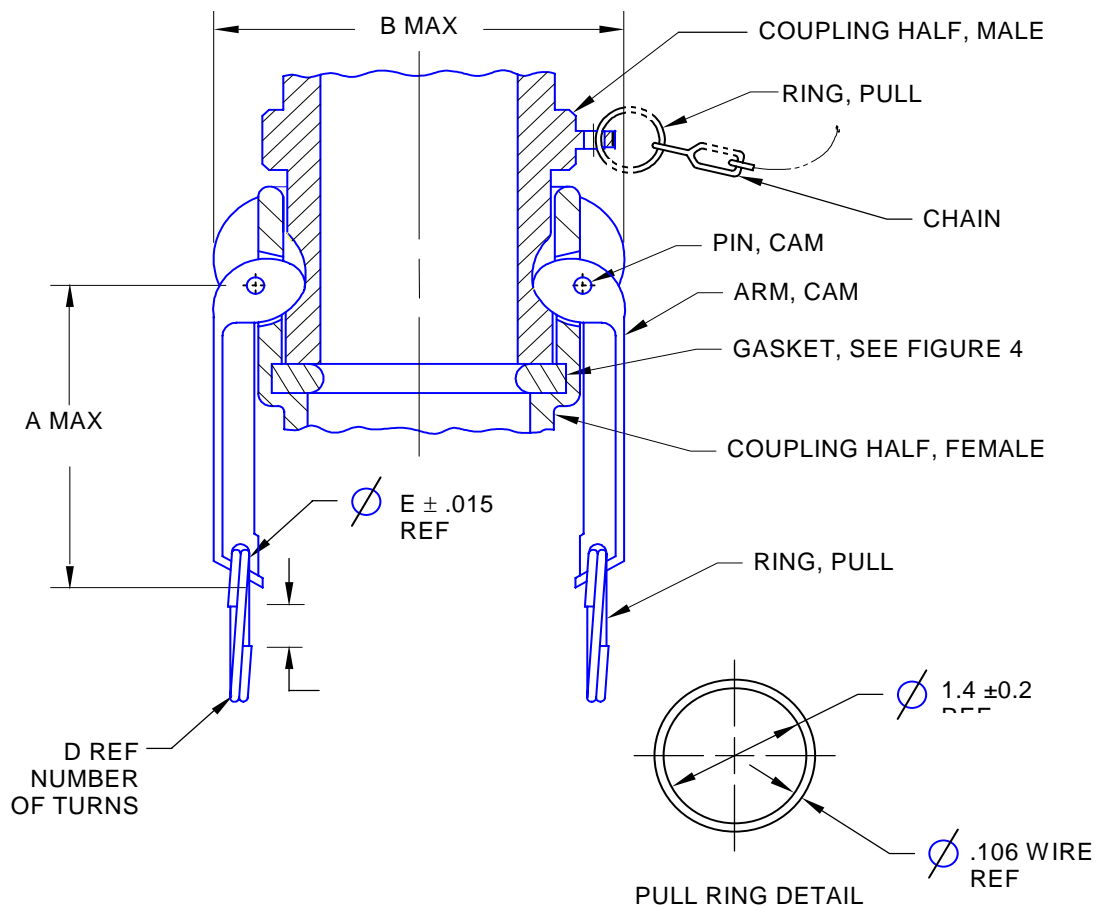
Coupling assembly, quick-disconnect, cam-locking type.
